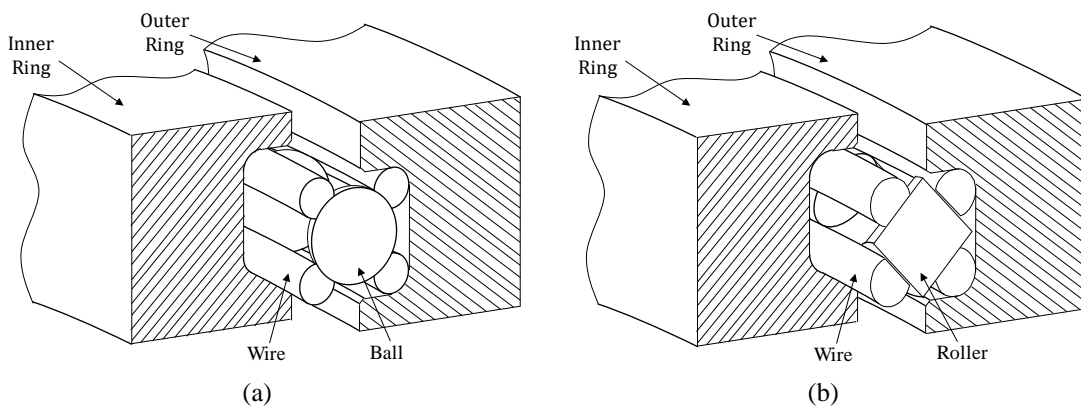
Wire race bearing cross-section: (a) Ball (b) Roller
